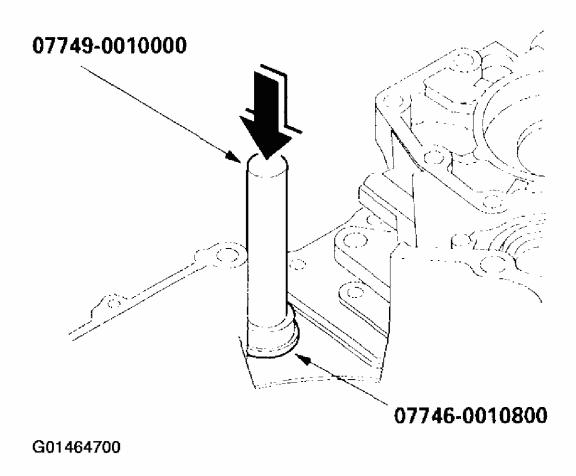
Installing The Oil Seal Courtesy of AMERICAN HONDA MOTOR CO., INC.
